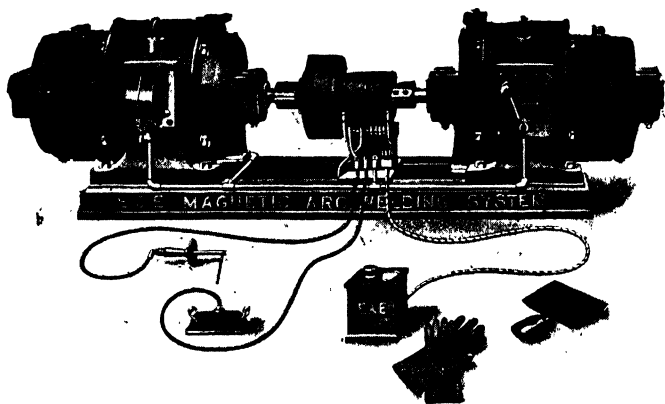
EQUIPMENT AND ENGINEERING CO.'S PLANT.
